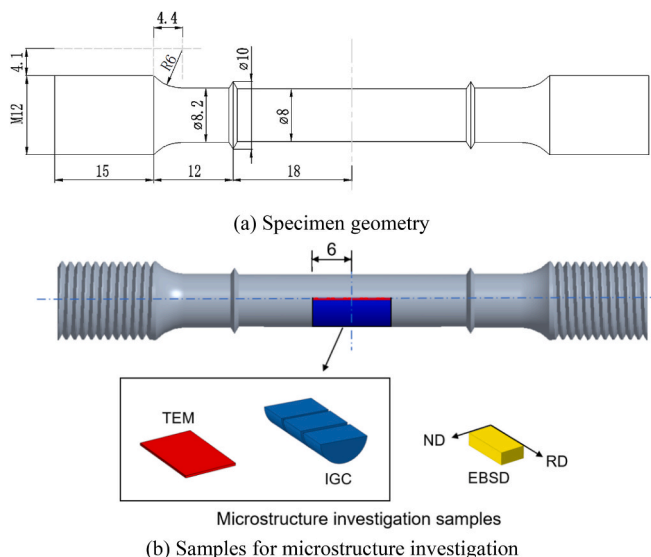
Specimen geometry adopted in this study (dimension in mm).
